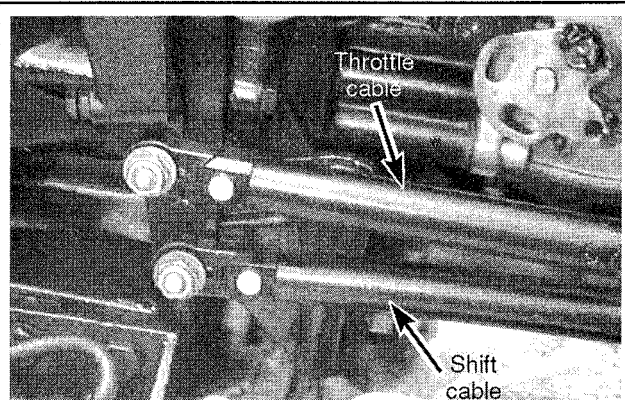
The remote cables should be adjusted whenever they have been disturbed
